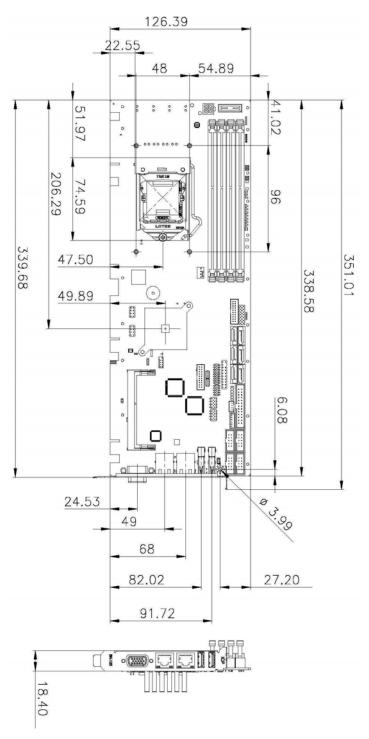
PCIE-Q870-i2 Dimensions (mm)
